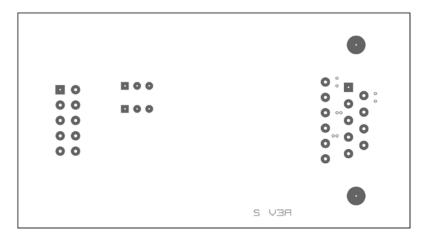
Low EMI Demo Board Layout (DC1747A), Bottom Layer
